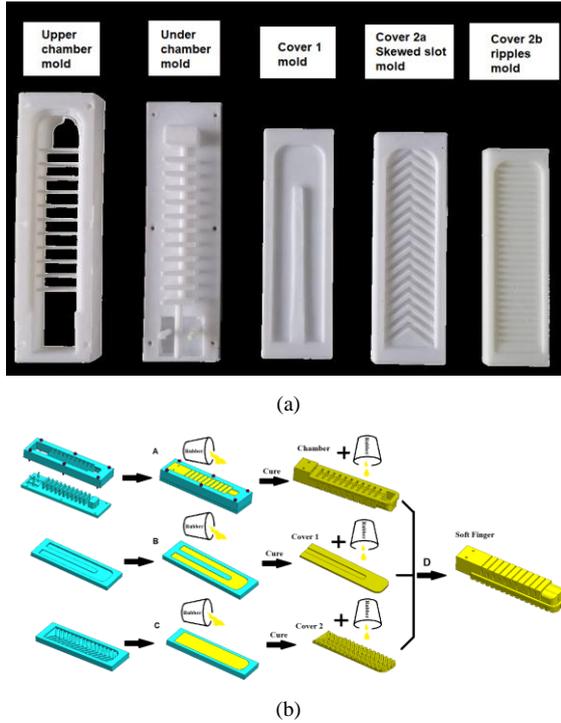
Fabrication Patterned Profiles: (a) 3D printed molds (b) soft finger fabrication summary.
